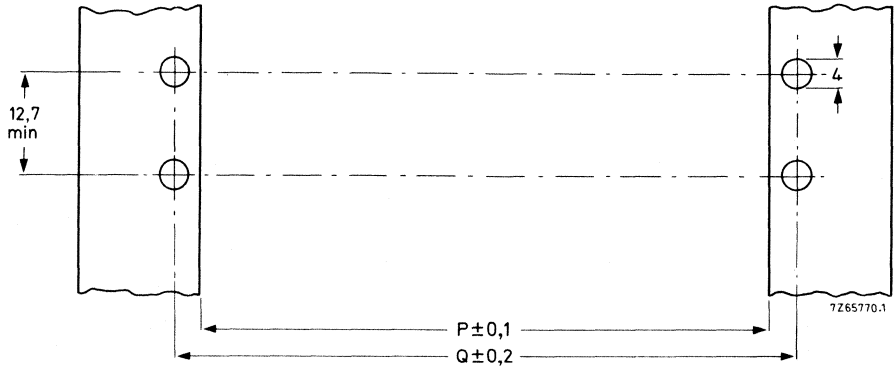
Piercing diagram for rail mounting; see Table 3 for dimensions P and Q.
